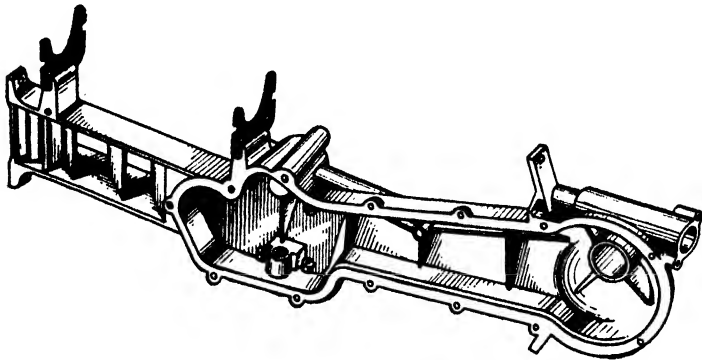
This large die casting for a washing-machine gear housing, though fairly uniform in section thickness over most of its area, has many thicker areas around bosses, fastening points, and bearings. Ribs are employed to gain stiffness and help distribute stresses where loads are concentrated, as at fastening points. Black extensions are stamped parts cast in place to act as motor supports.
